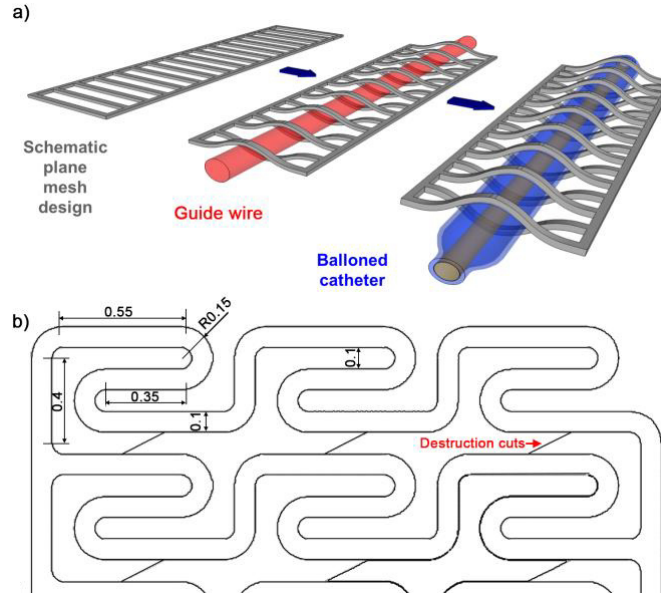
a) Schematic representation of the stent expansion with a planar mesh. b) Stent design for flat to tubular form expansion.
